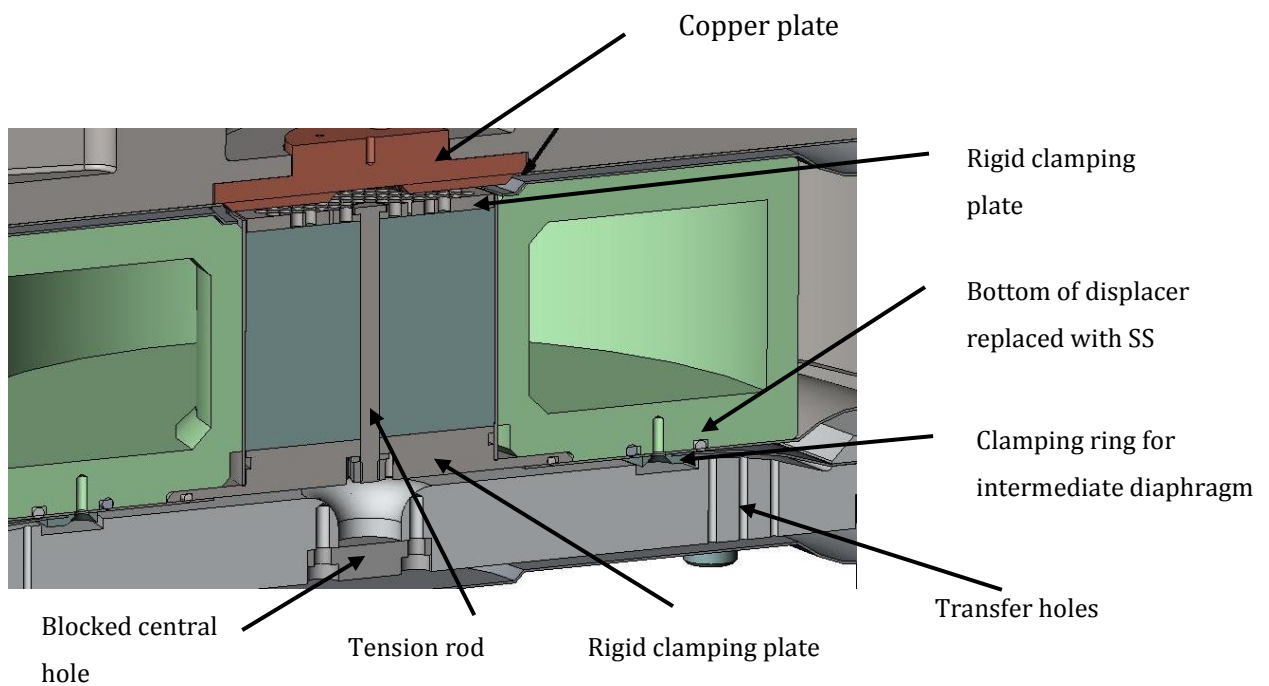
Modifications to the prototype. The clamping ring seals and retains the intermediate diaphragm. The regenerator is clamped between two perforated rigid clamping plates with the tension rod. A copper plate was added to enhance heat transfer at the coldest part of the machine.
